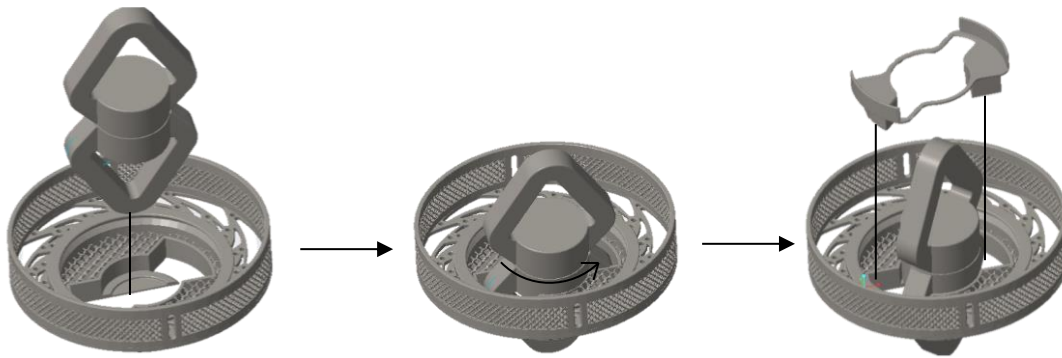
Assembly of the support component with the swivel carbine (Source: Author's own).
